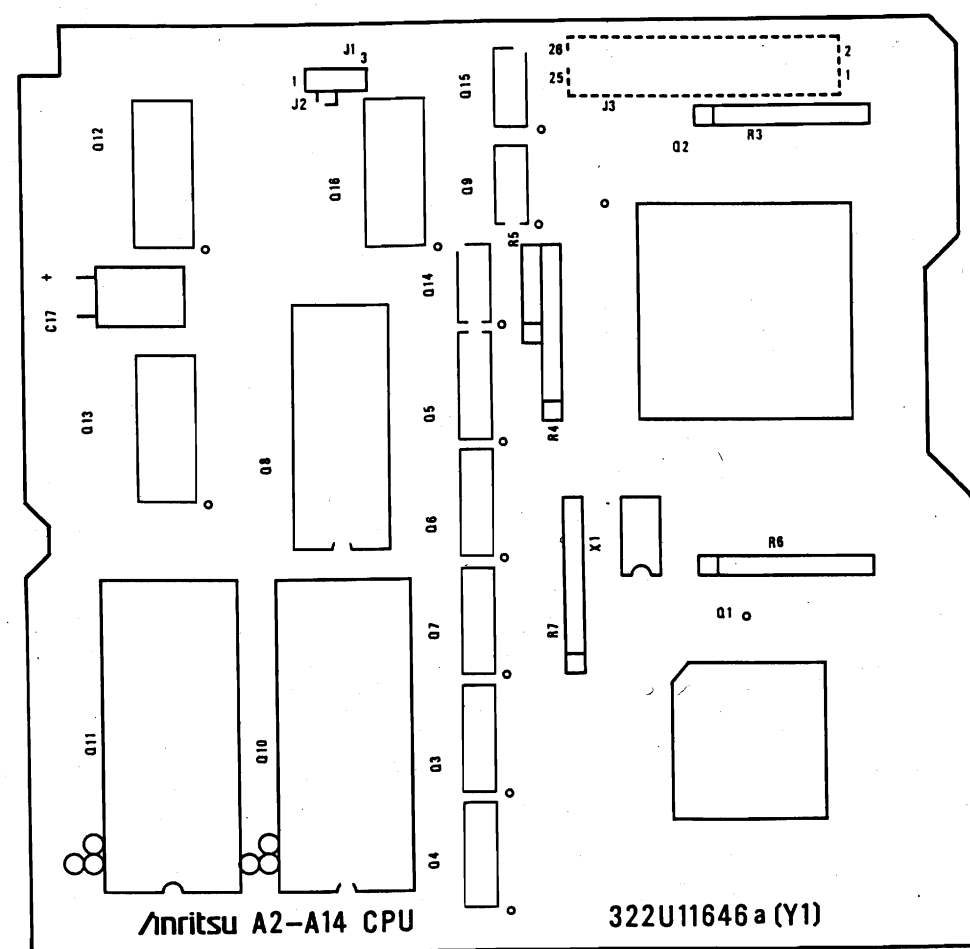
(1/2) A2-A14 CPU PC-Boards Parts Layout (Parts Side) 16
